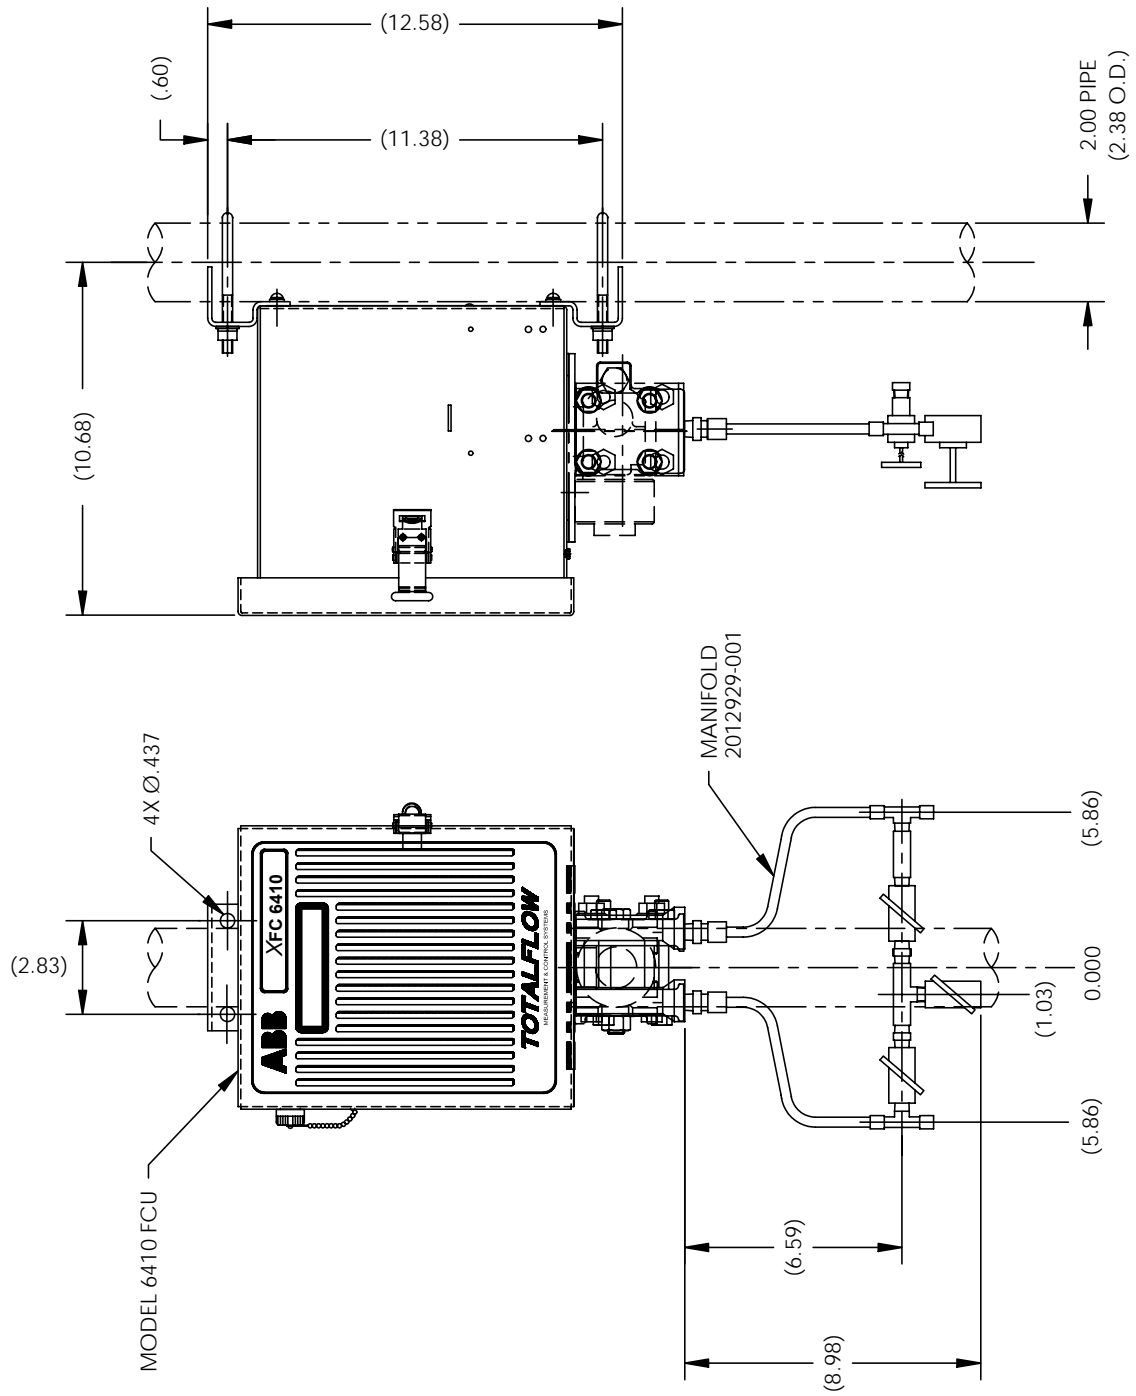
Model XFC 6410, Pipe Mounted W/Discrete Manifold
